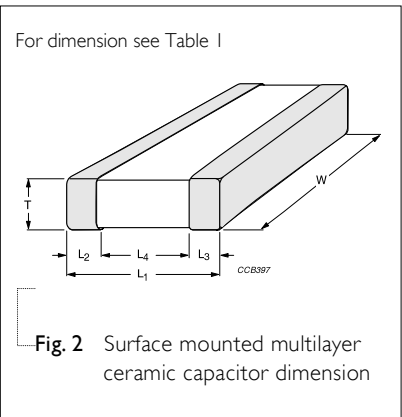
Surface mounted multilayer ceramic capacitor dimension
